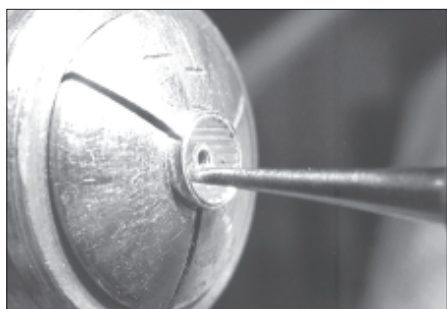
A close view of the burr inserted in the cap and adjusted to cut on center.
